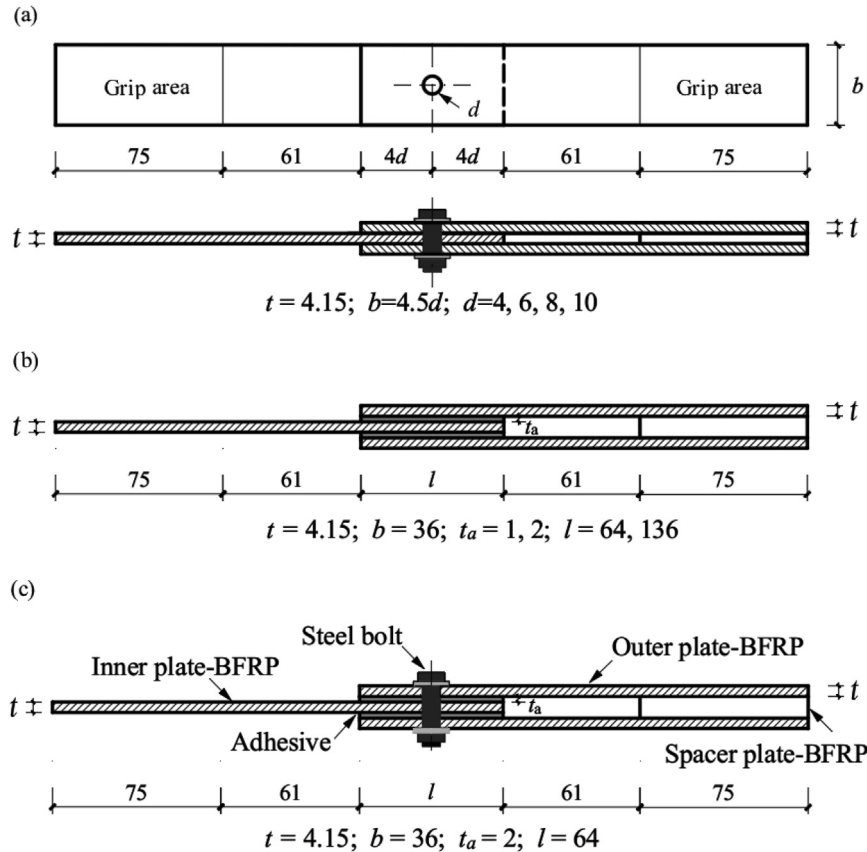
Joint dimensions: (a) bolted joint; (b) bonded joint; (c) hybrid joint (dimensions in (mm)).
